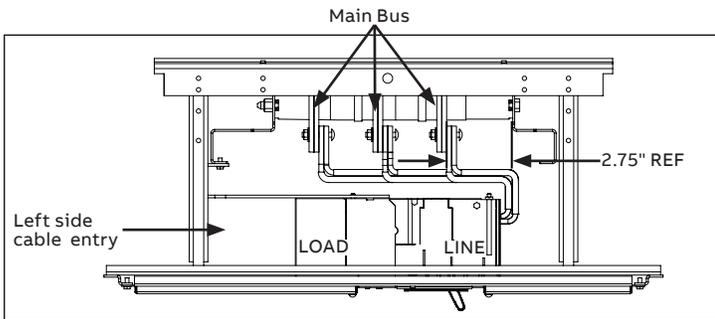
Single Branch, ABB XT5; Left side cable entry, Assembly end view
